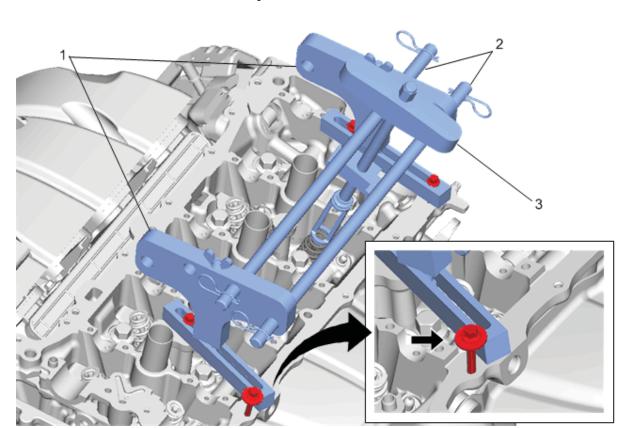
EN-50717 Valve Spring Compressor Courtesy of GENERAL MOTORS COMPANY
